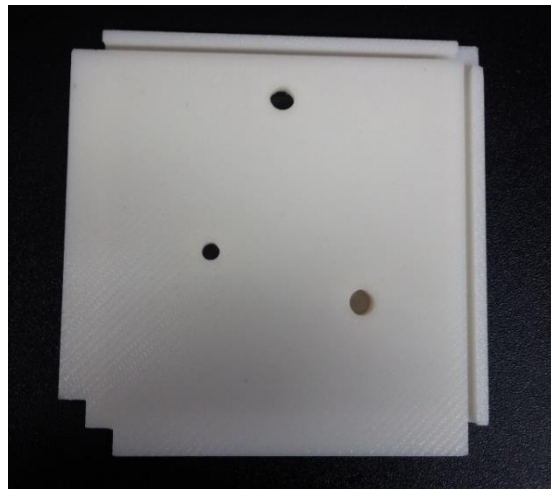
3D Printed Platform with Electronic Components Embedded (Bottom View)
